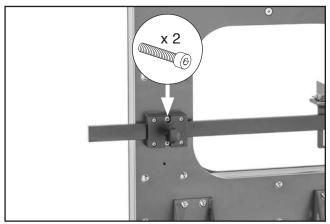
Location of fence assembly cap screws (assembly shown installed in upper position).
